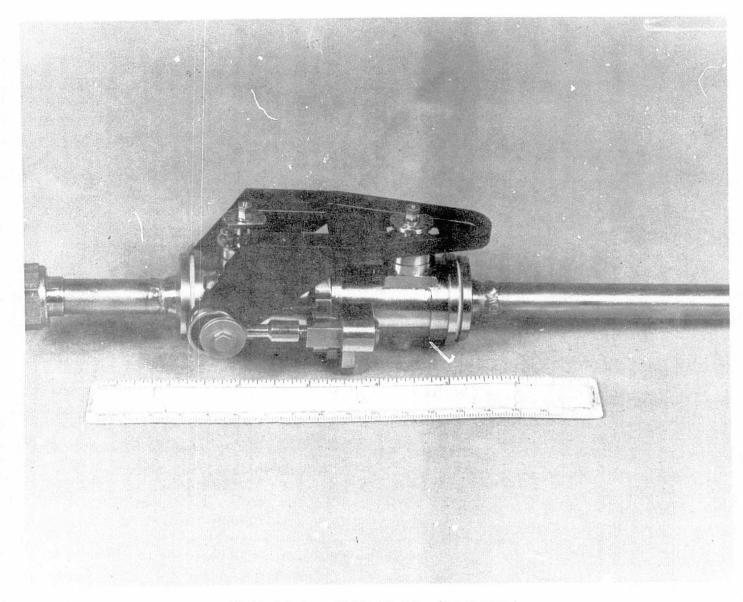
ASSEMBLED PID (SIDE VIEW)
